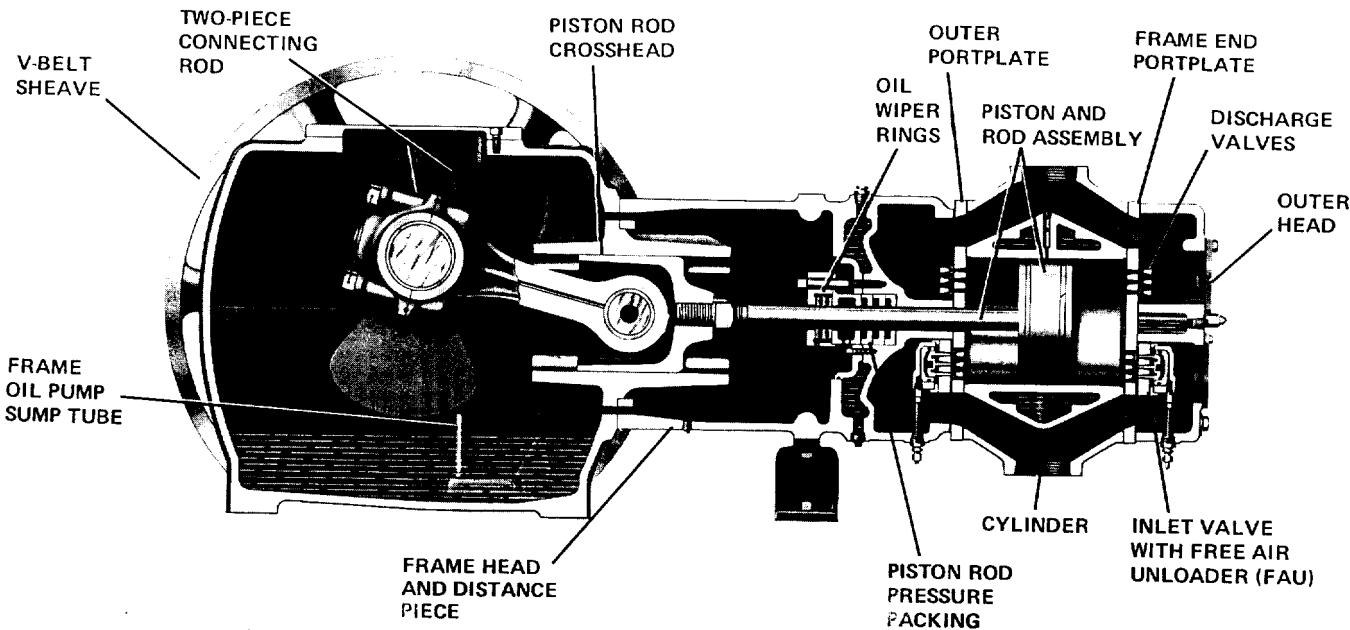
Cross Section View of Typical ESH Lubricated Compressor.
